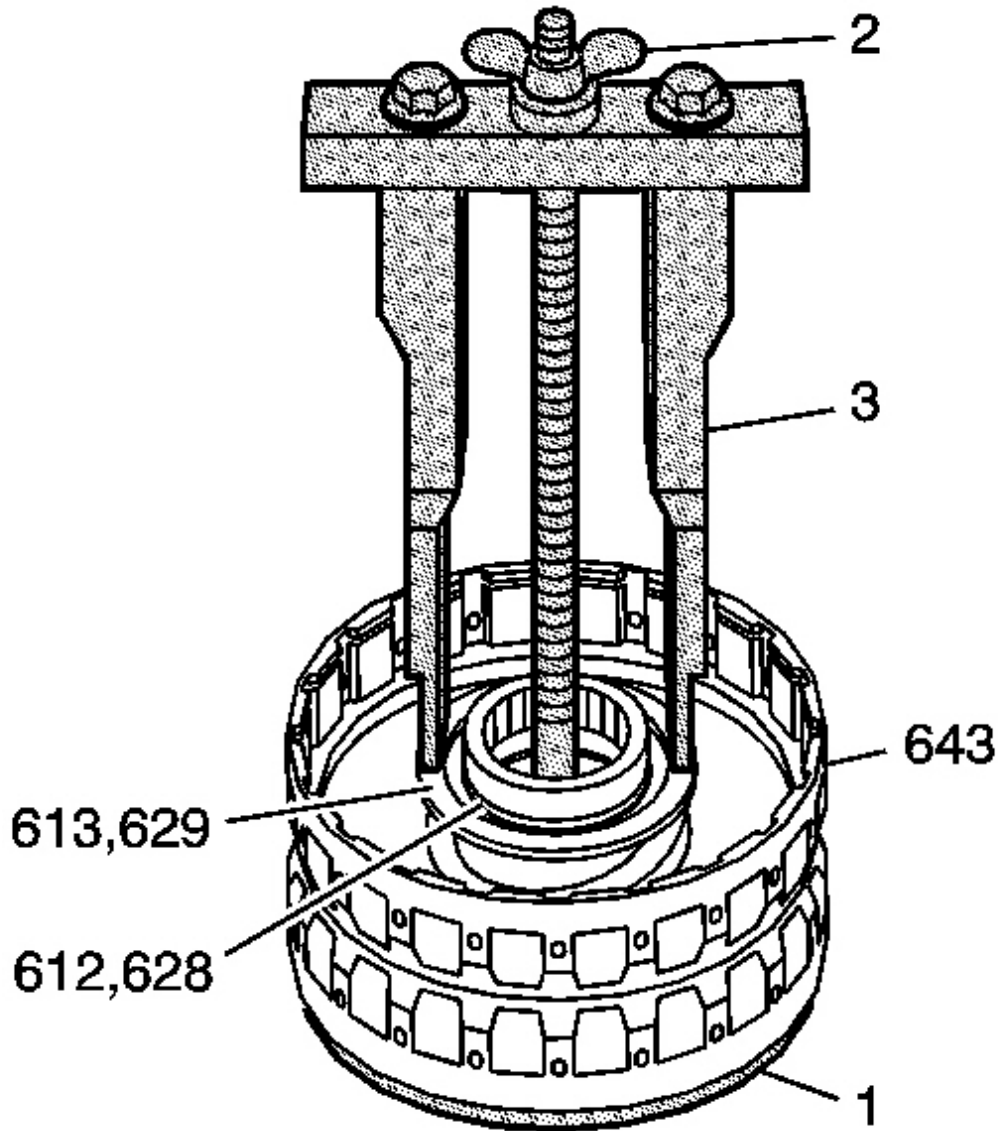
J 45124, J 23327, Clutch Piston Return Spring, Retaining Ring & Return Spring Retainer
